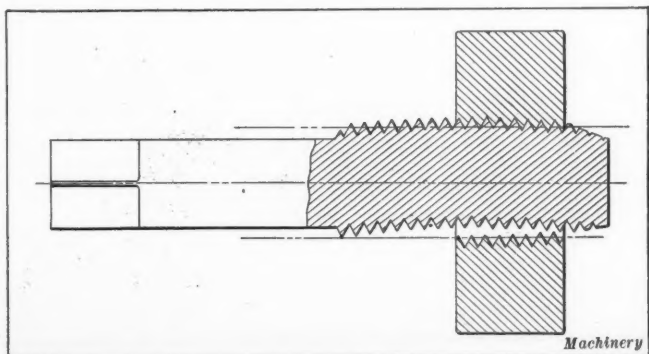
Threaded Portion of Tap is bent, which results in producing an Oversize Hole
